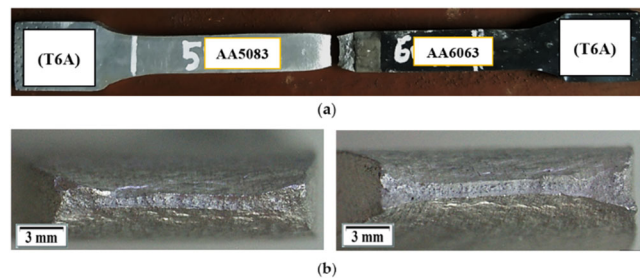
a) Fractured specimen T6A; b) Macrostructure of the fracture surface of T6A
